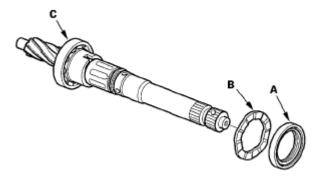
Removing Valve Oil Seal And Wave Washer From Pinion Shaft Courtesy of AMERICAN HONDA MOTOR CO., INC.
